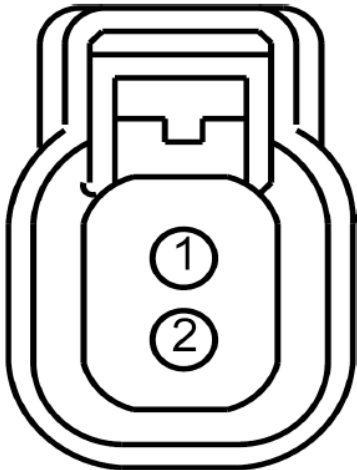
Right Front Wheel Speed Sensor Connector End View (C160)
